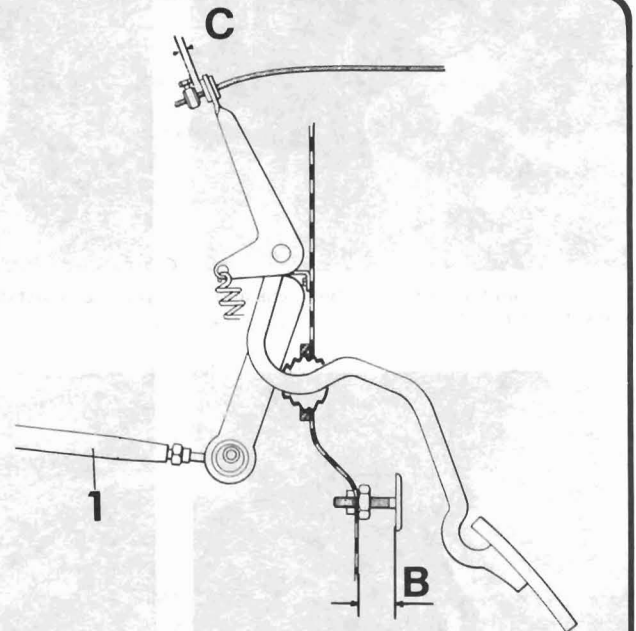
Hand throttle cable stop clearance and accelerator pedal stop projection (Sec 14)
